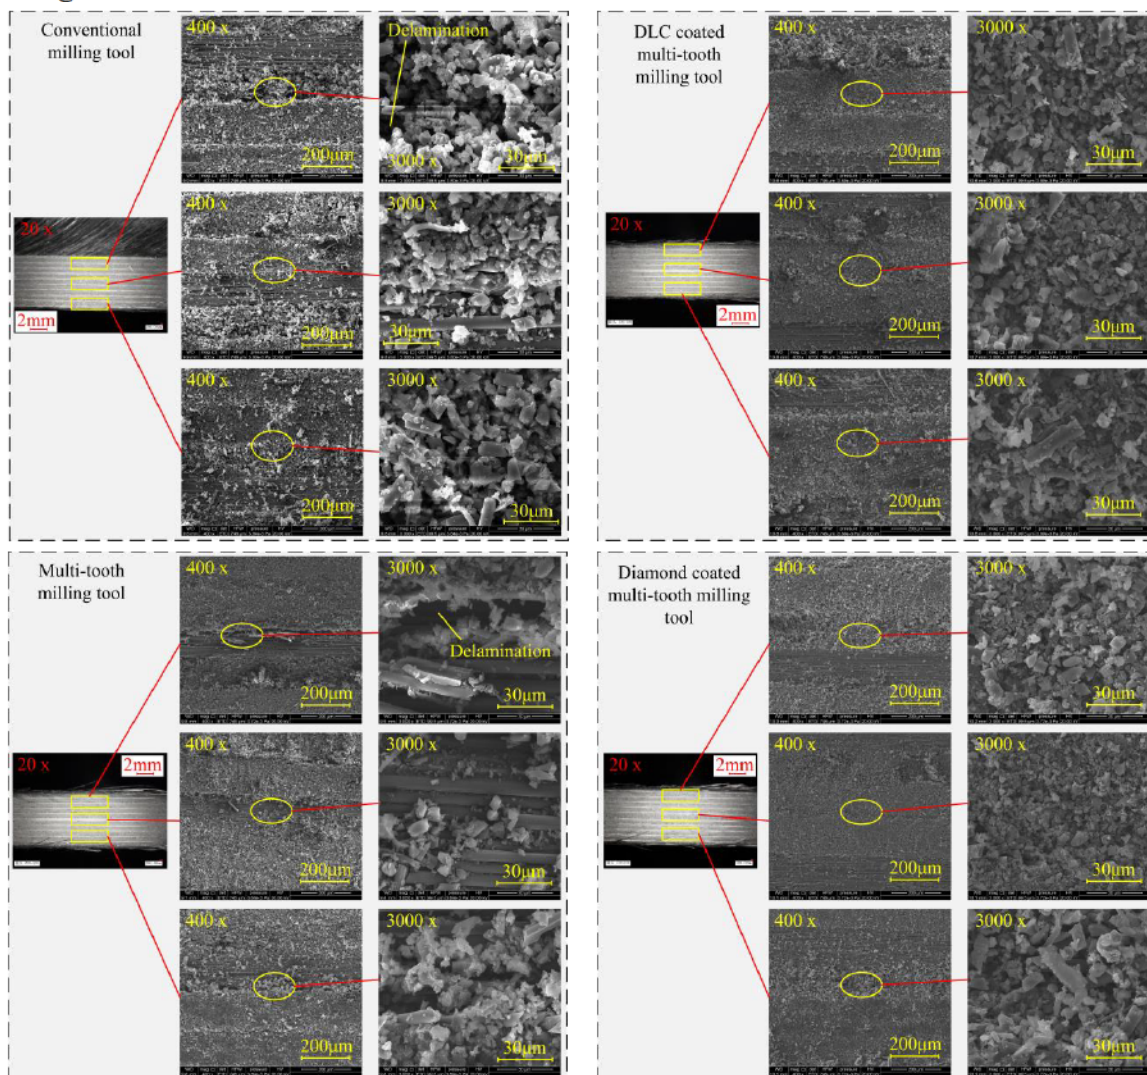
The machined surface of the CFRP workpiece with different tools (VB: 0.1 mm)
